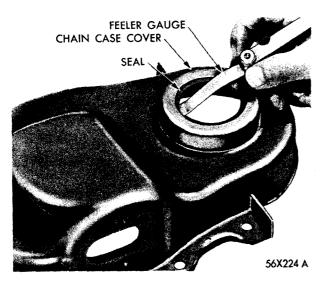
Checking to Make Sure Seal is Properly Seated
